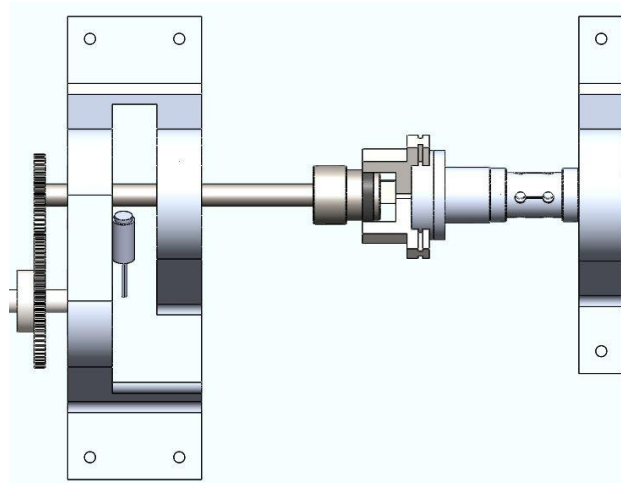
Cross Sectional View of Selected Bearing-Shaft Interface Design
